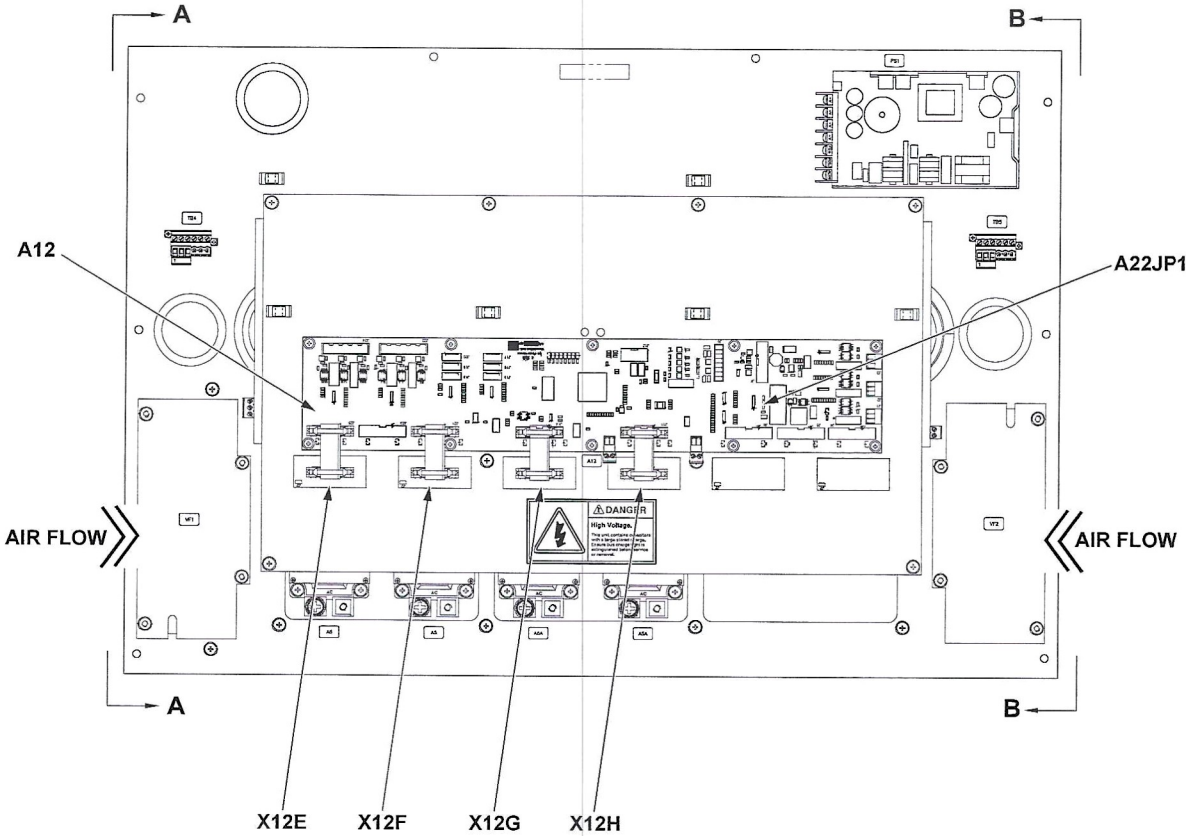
Power Module Assembly – A2, Sheet 1 of 3
